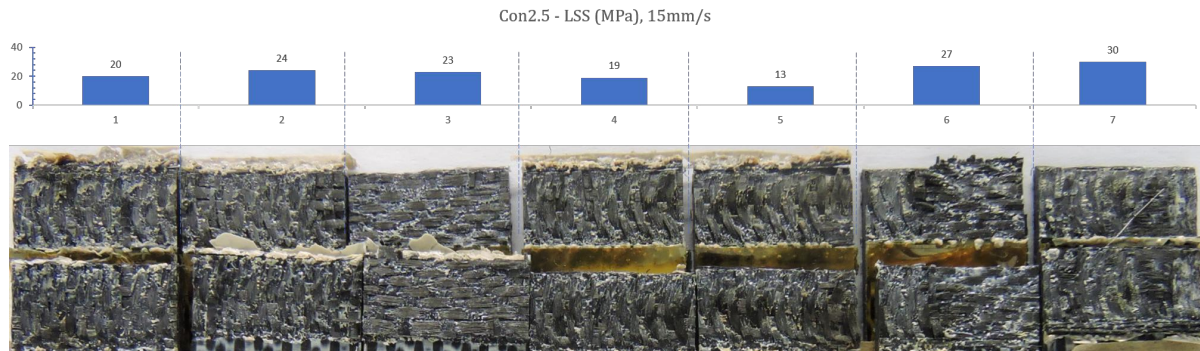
The fracture surfaces at a welding speed of 15mm/s
